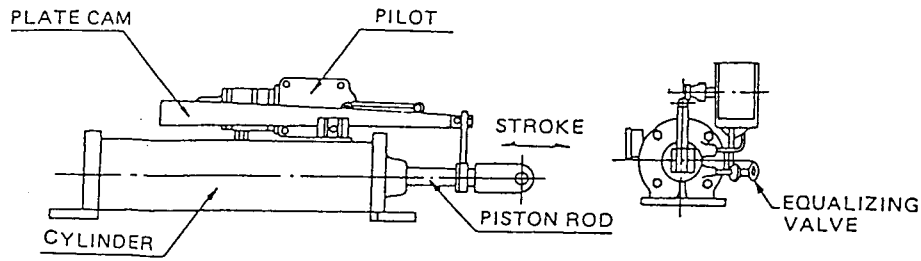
Horizontal G-O-Motor with plate cam feedback mechanism
